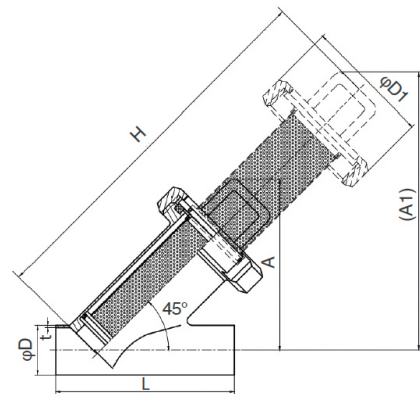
W2000 SS Strainer - ISO Welding
